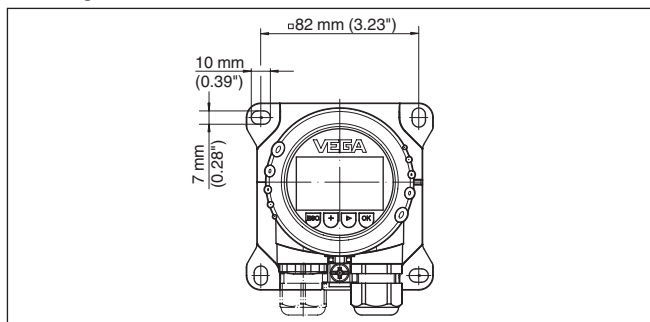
Drilling dimensions for VEGADIS 81 for wall mounting
